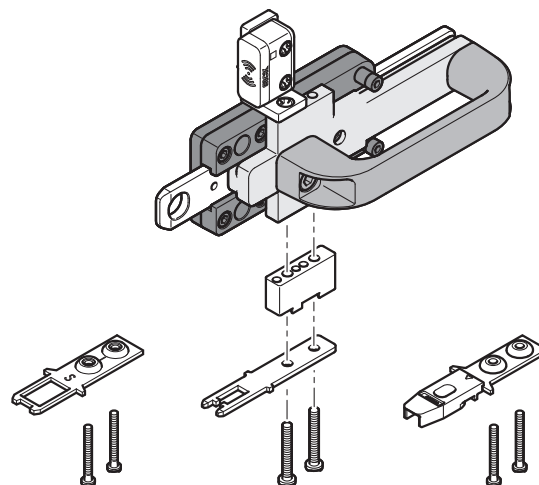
MB1-BL – Mounting the actuator for the safety locking device
